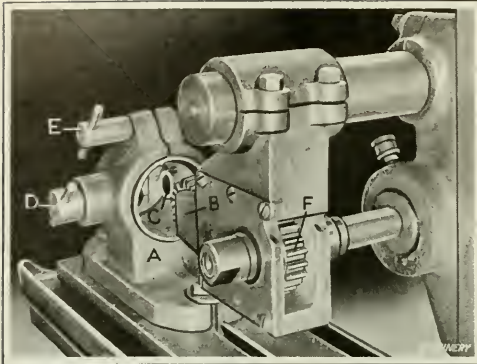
Milling Machine equipped for facing Inner Ends of Wrist-pin Bearing Bosses
